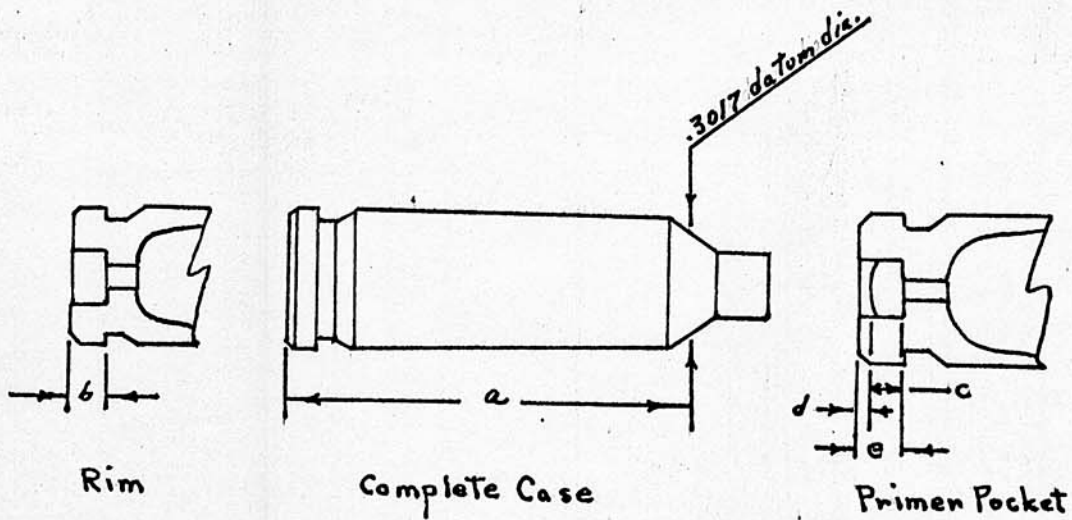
5.56-MM Cartridge Case and Primer Assembly
